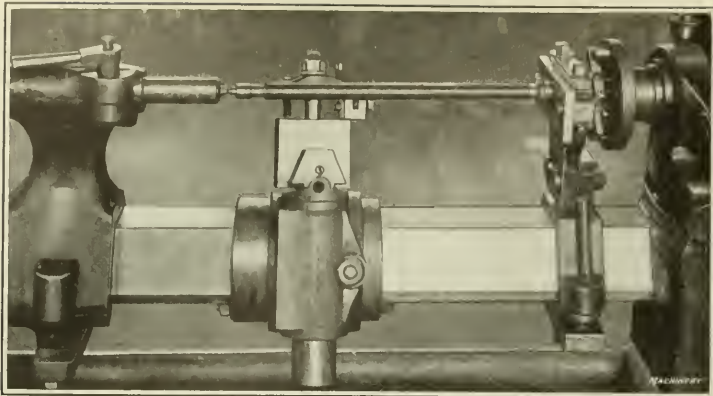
Close View of Tool, Work and Work-holding Device taken from Back of Machine
